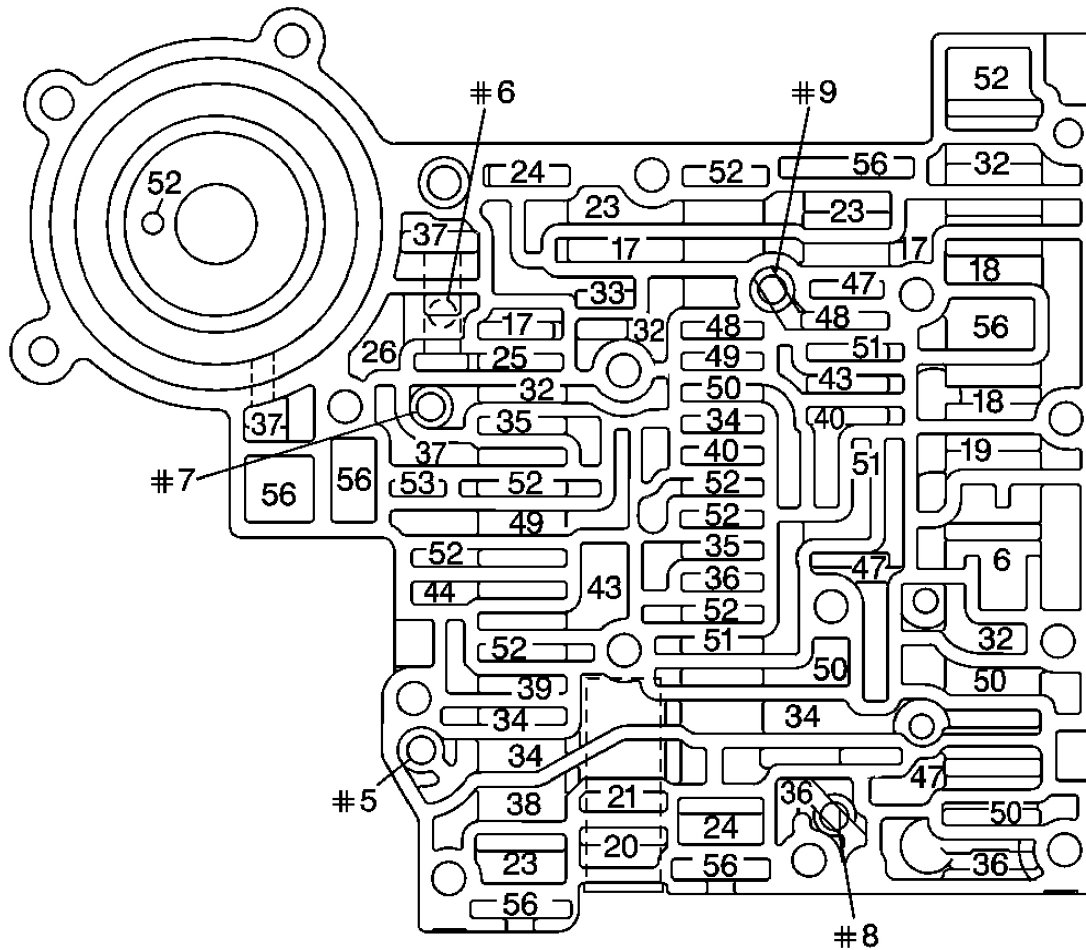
Lower Control Valve Body Fluid Passages (Lower Channel Plate Side)
